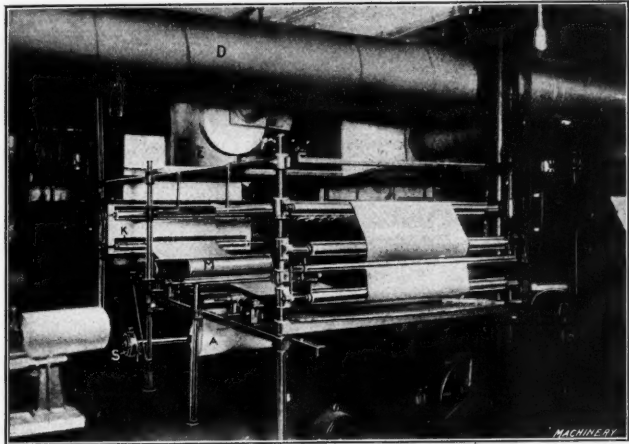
Front View of Coating Machine and Dryer for Blueprint Paper of the Indianapolis Blueprint and Supply Co., and is said to be the most modern and efficient type in use.
